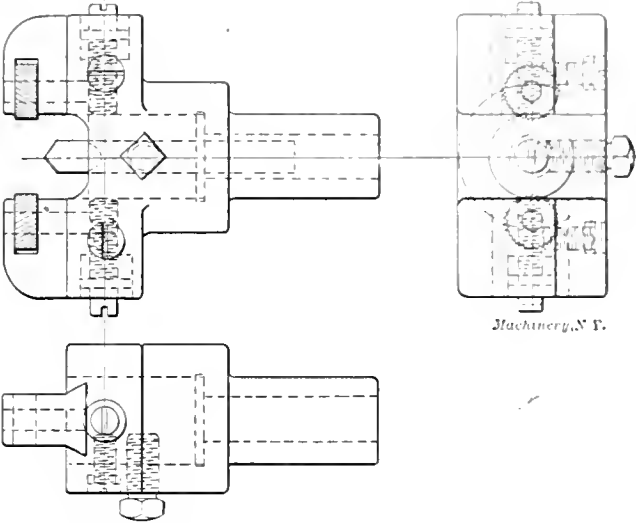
Turret Knurl-holder for Brown & Sharpe Automatic Screw Machines
